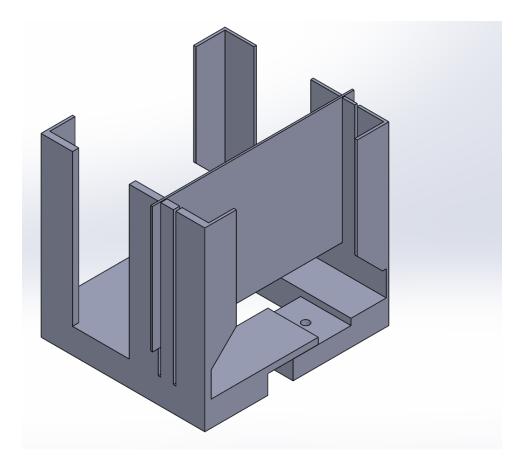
ISO view of the Final Bottom Box Dispenser Prototype Design
